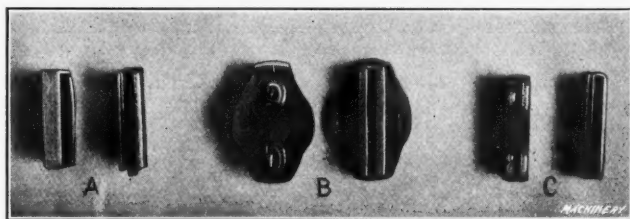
Evolution of a Steel Typewriter Type. A, The Slotted Blank; B, The Kneaded Type; C, The Trimmed Type
